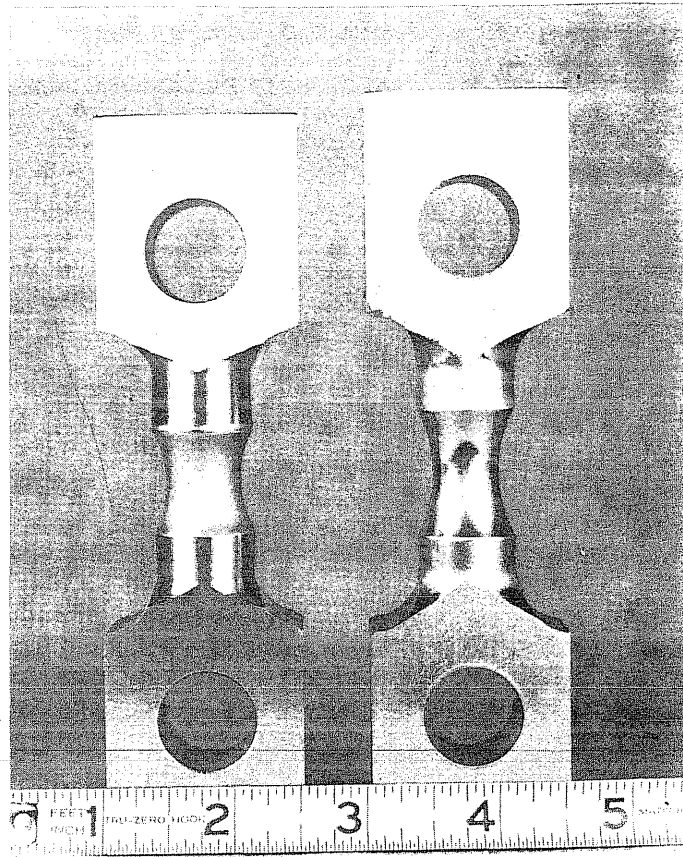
SPECIMEN PRECOMPRESSED TO -0.32 STRAIN
